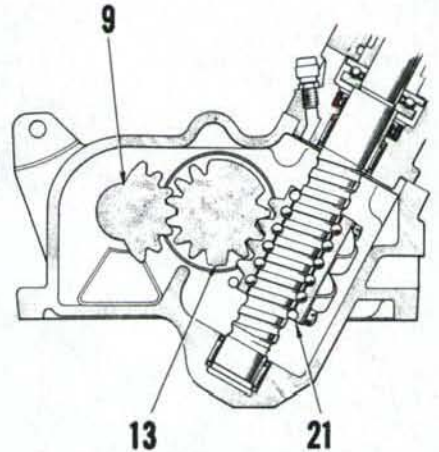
Cross-sectional view of steering gear assembly showing correct installation (timing) of sector gears and wormshaft; refer to Fig. 12 for exploded view of unit and for parts identification.
